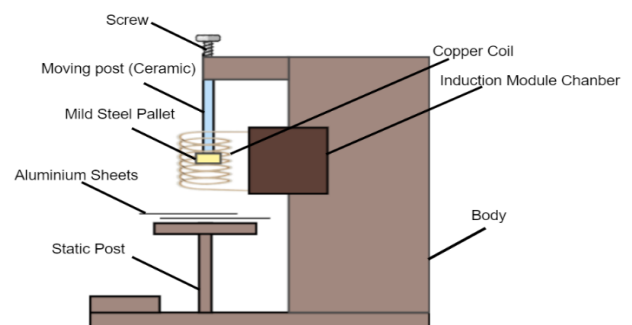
Setup used for experiment of spot welding of aluminum sheets using induction heating
